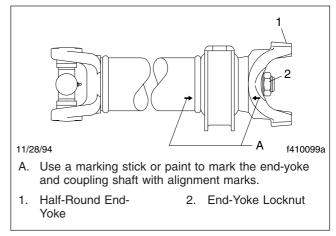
, Alignment Marks on a Coupling Shaft With an End-Yoke
